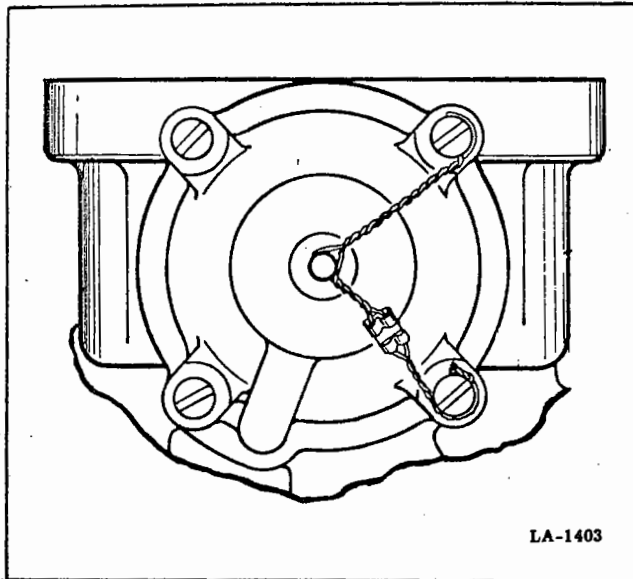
Lockwiring and Sealing Discharge Nozzle Adjustment
